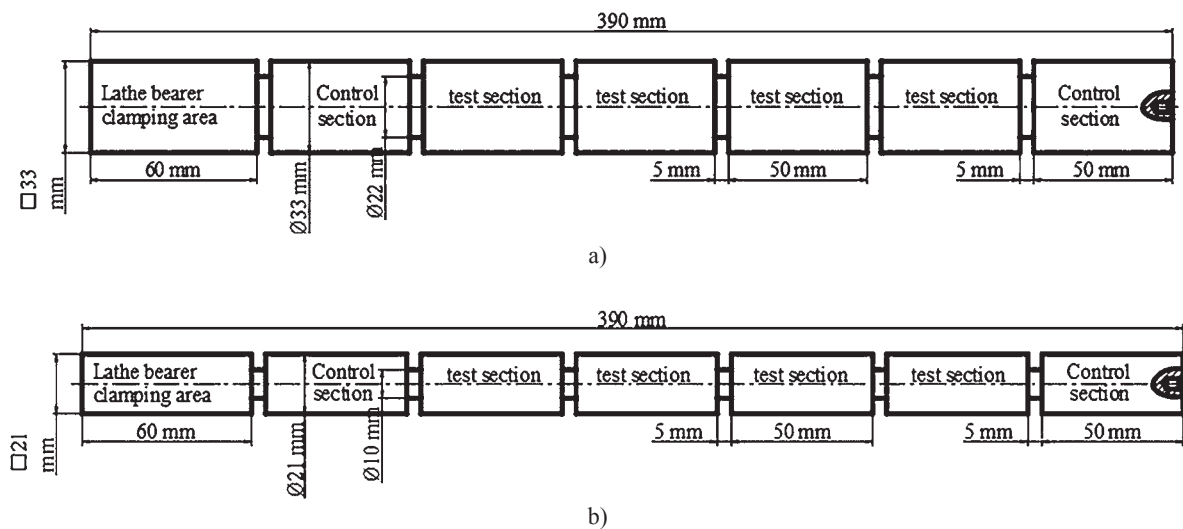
Technical drawing of test specimens: a) test specimen with large diameter, b) small diameter test specimen
